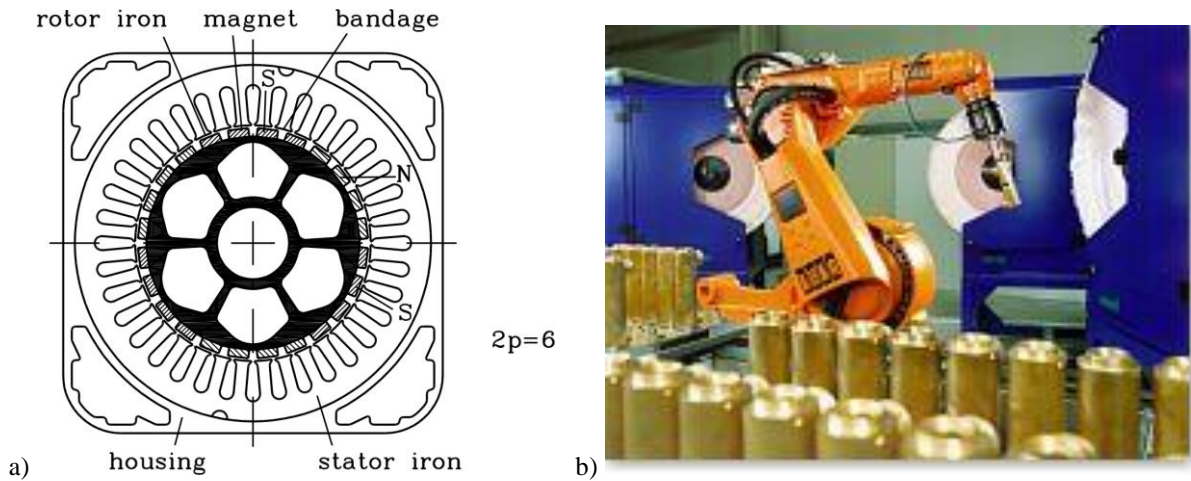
Permanent magnet (PM) excited synchronous machine: a) Axial cross section of 6 pole synchronous machine with cylindrical rotor and surface mounted rotor rare earth high energy magnets, b) Application of inverter fed PM machine as adjustable speed drive for driving robots
